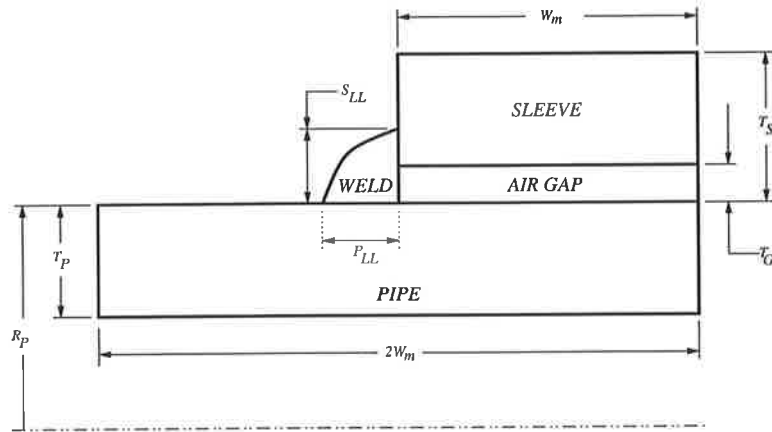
Schematic: Circumferential fillet weld.
